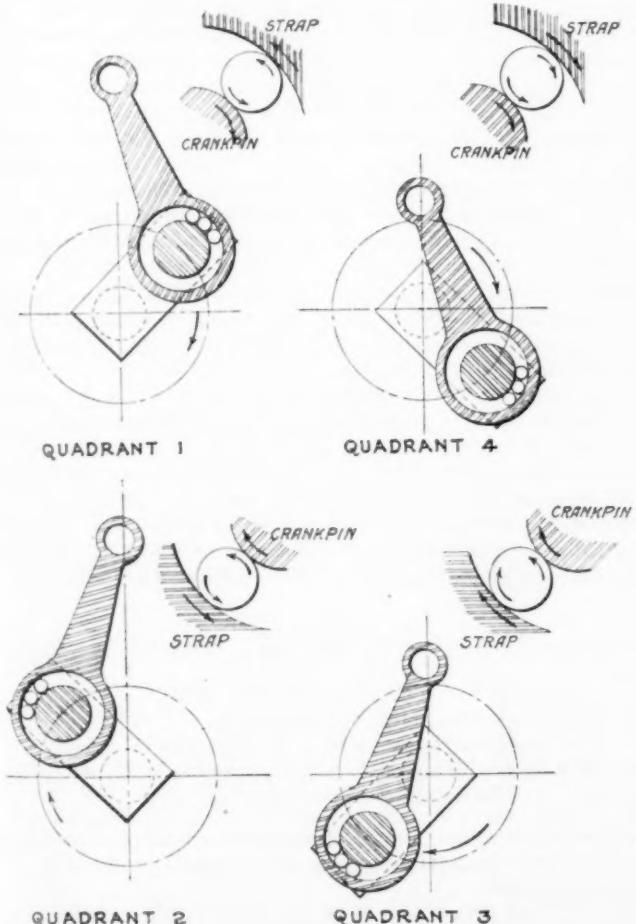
FORCES ACTING ON BALL-BEARING AND ROLLER-BEARING CONNECTING RODS
